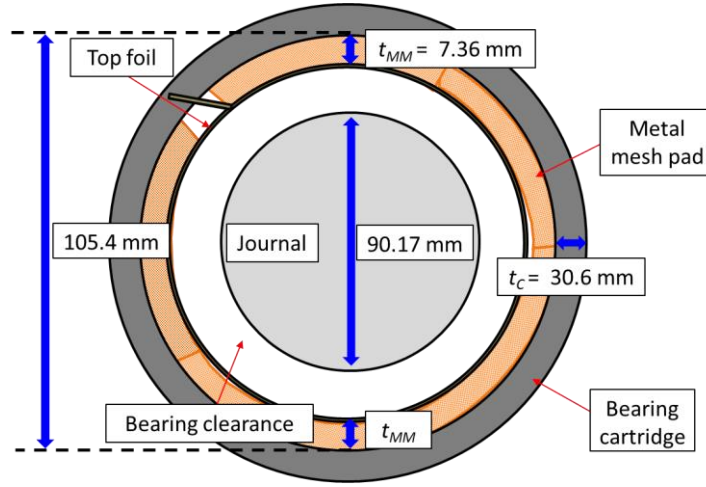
Schematic view of a five pad metal mesh bearing. Dimensions shown in mm.
